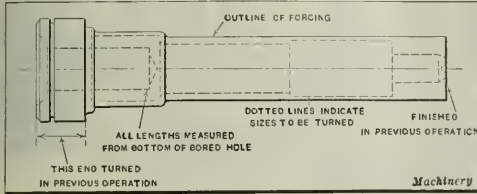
Automobile Clutch Gear Forging for which Chuck shown in Fig. 2 was designed
